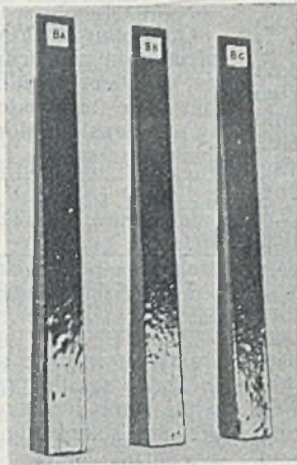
Wedge Test Castings poured in Facing Sand containing Soot, and taken from the mould at various temperatures. (A) 950, (B) 900, and (C) 850 deg. C., and subsequently Enamelled.
